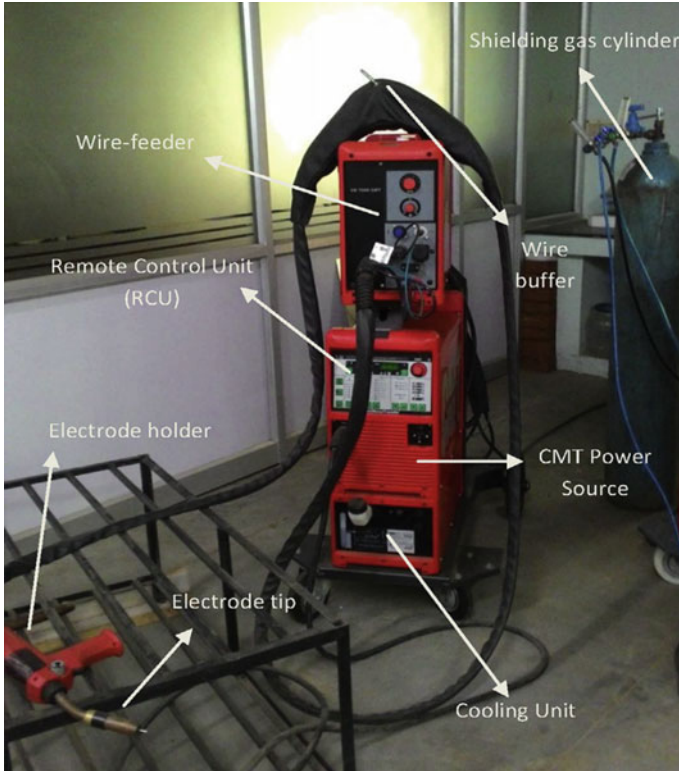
CMT 7000 VR machine with parts pointed out [1]
